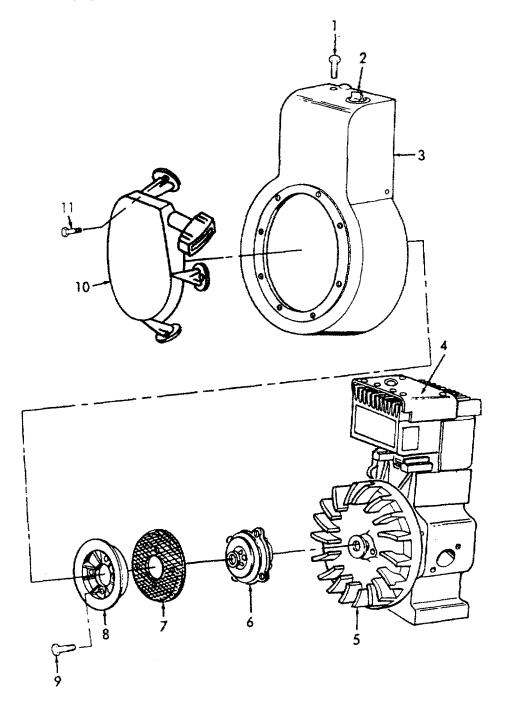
Starter, Clutch and Blower Housing, Installation.
